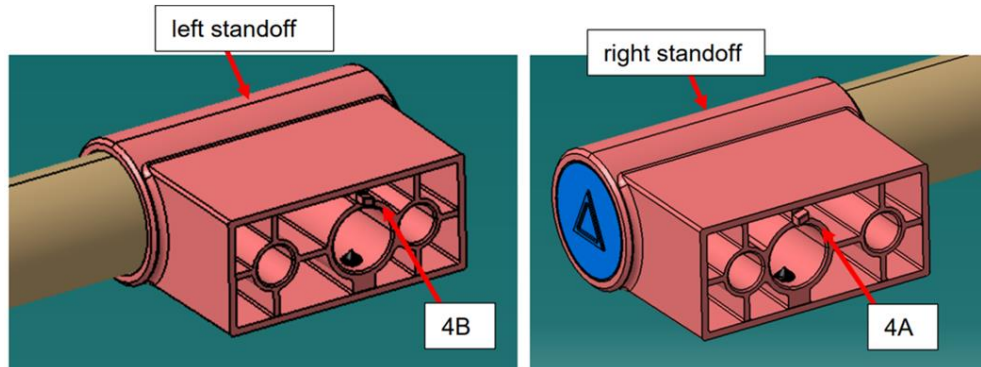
A perspective view of an embodiment of the invention showing angled, key-shaped protrusions
